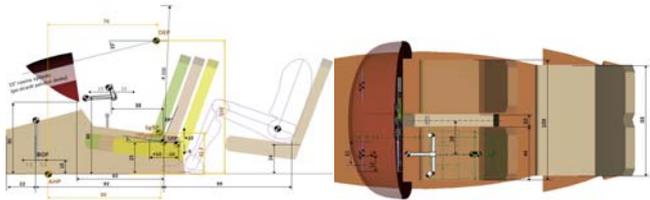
Reference dimension for small aircraft with adjustable seats and/or adjustable pedals
